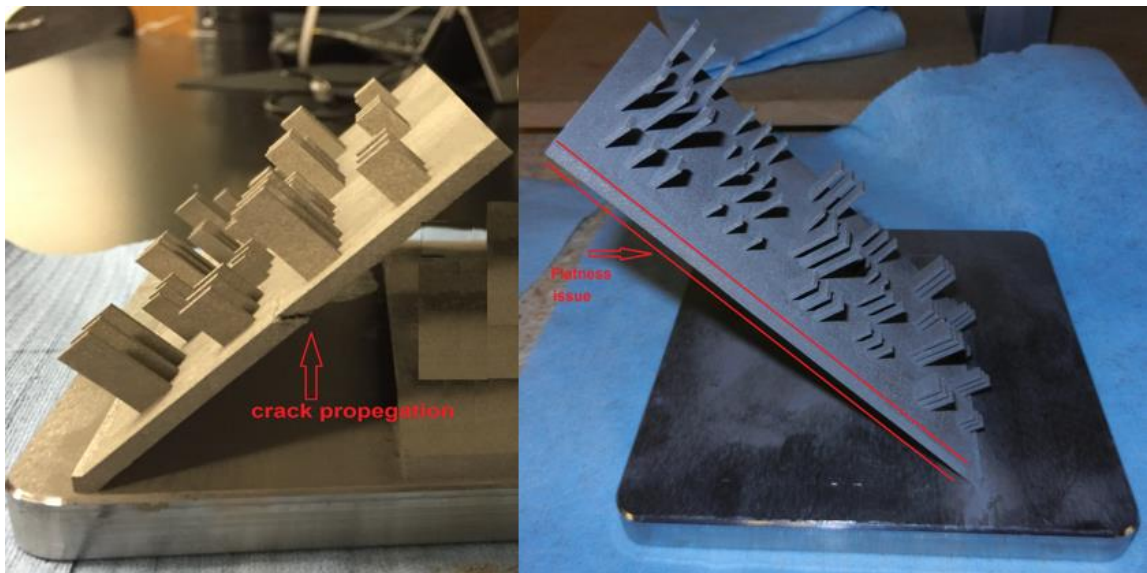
AM Inconel 625, minimized support structure, specimen: heat sink with fins (3mmx10mmx18mm). Design of experiment, (variables: height, thickness and angle of fin), part encountered flatness and crack propagation due to thermal stresses
